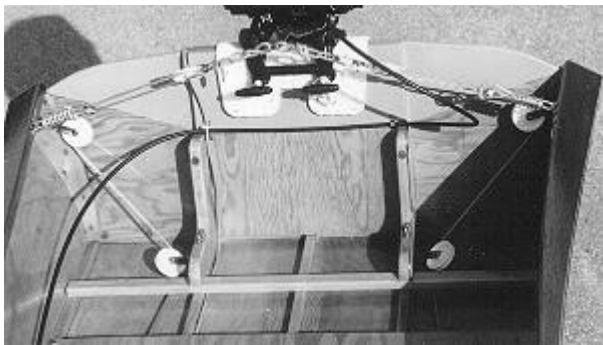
Steering cable pulley locations at the transom. Connection to the outboard motor will vary depending on the make of motor.
